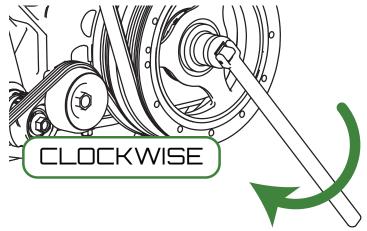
Rotating the Engine Crankshaft with a Breaker Bar
